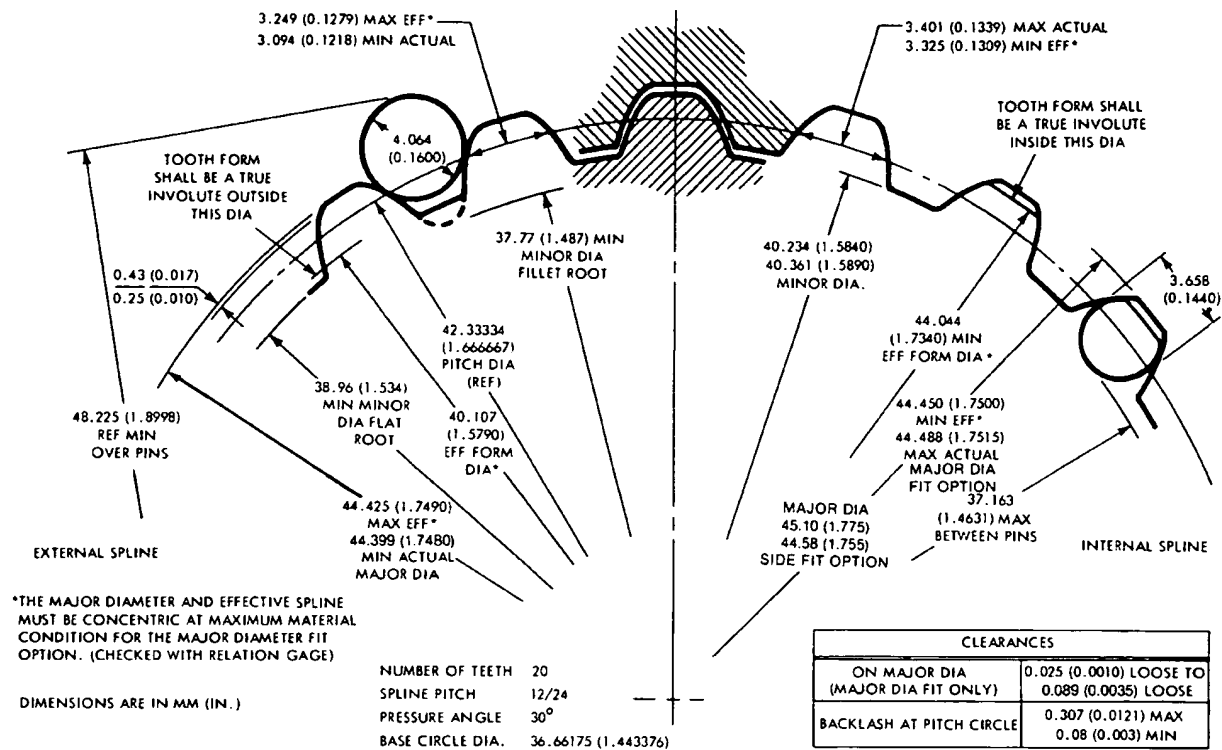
Type 3 power take-off 1000 r/min—45 mm (1 3/4 in.) diameter—involute spline dimensions
